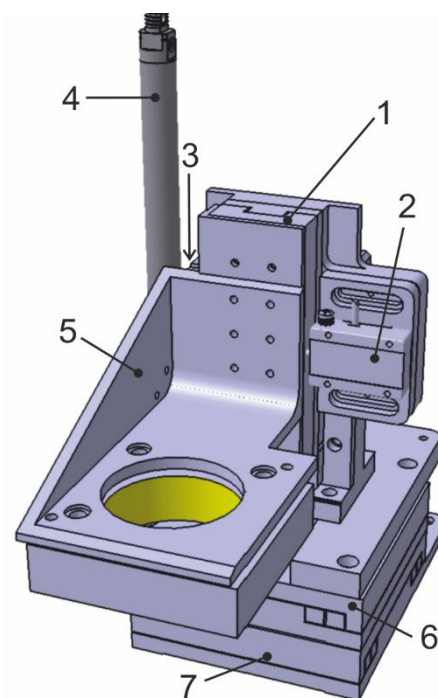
linear X-Y-Z stage assembly with specimen clamp; 1) Z-stage, 2) Motor, 3) Encoder, 4) air pressure cylinder, 5) specimen clamp, 6) X-axis, 7) Y-axis
